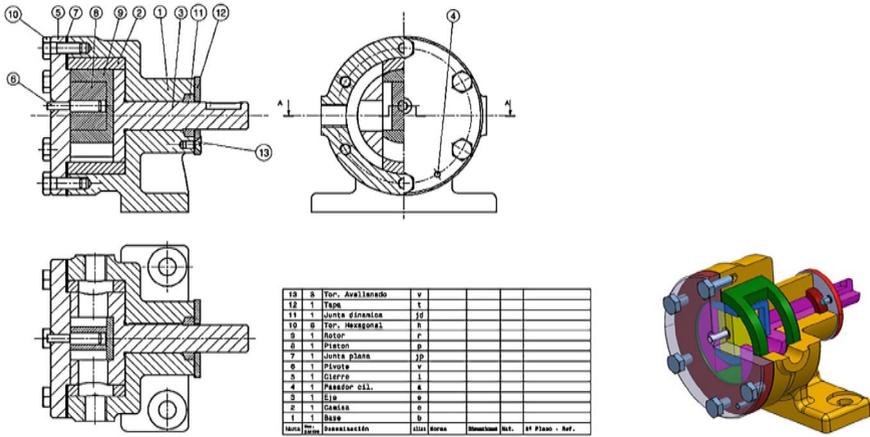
Eccentric pump assembly drawing and preliminary project model
